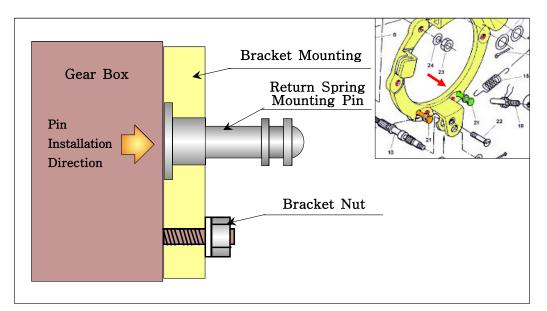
Rotor Brake System and Drive Shaft Assembly
